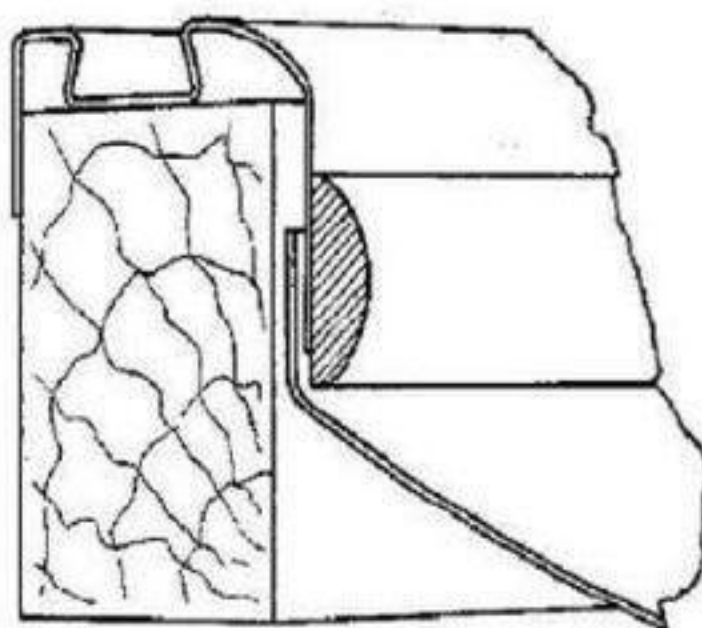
Shows Present Joint Construction Pulled Away From Shroud Bar Due to Improper Alignment of Front of Body
